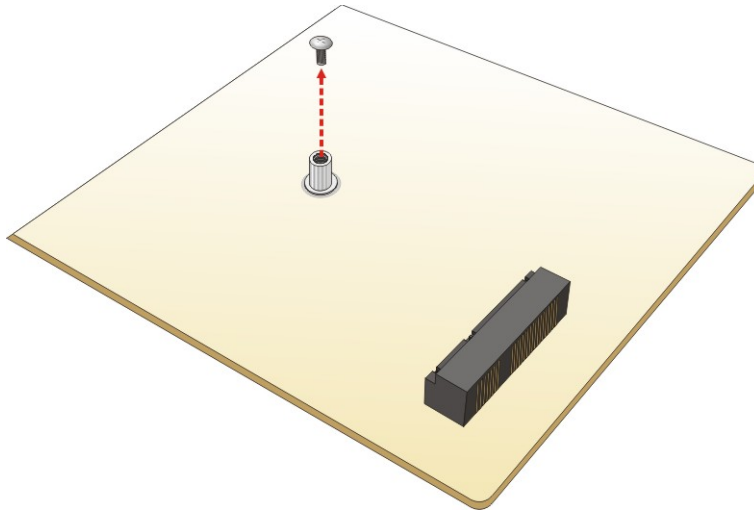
Remove the Retention Screw for the PCIe Mini Card
